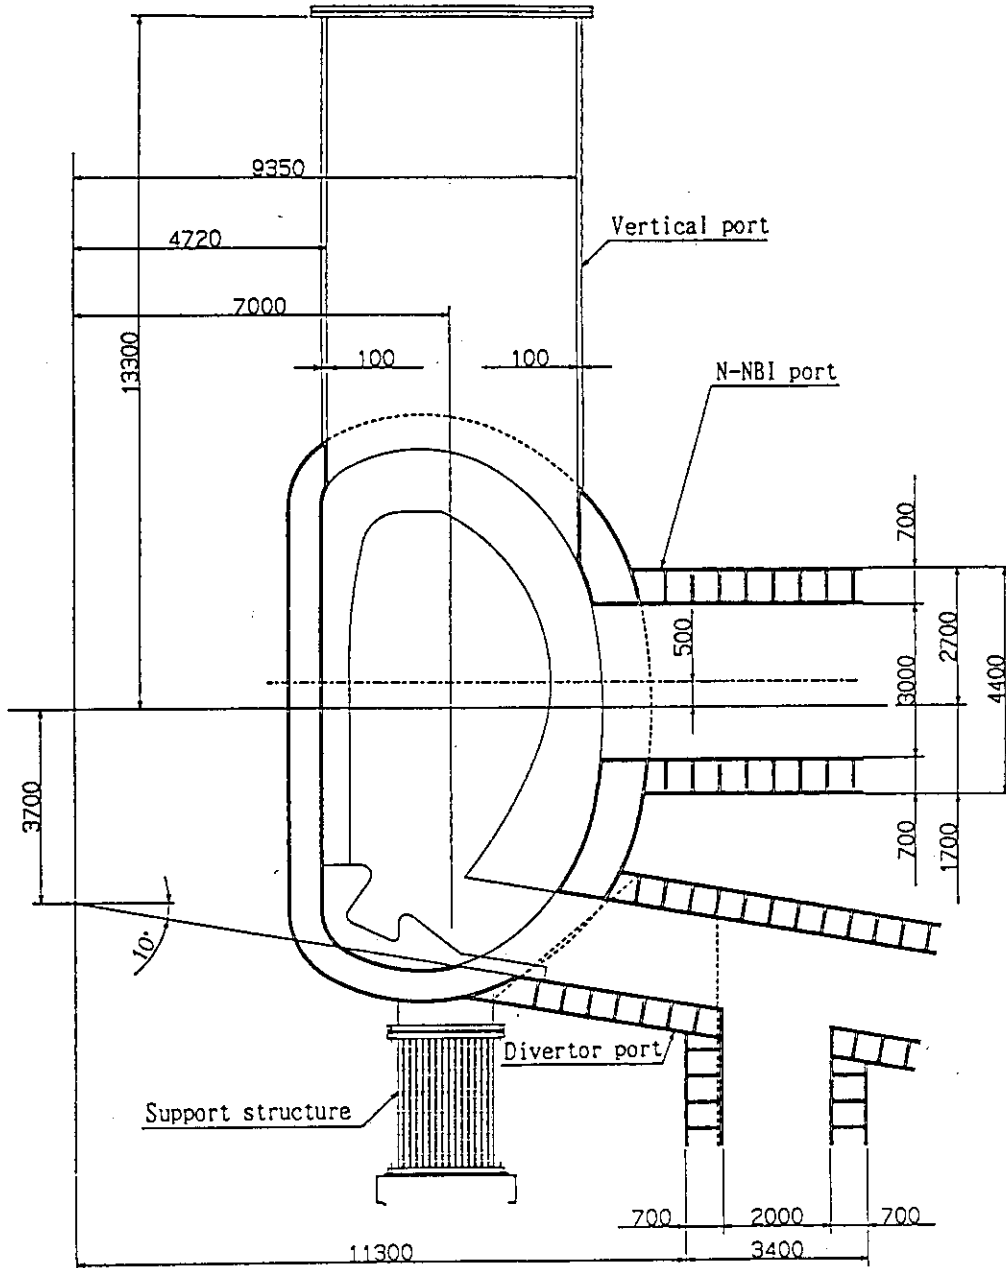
Elevation view of SSTR vacuum vessel and port layout.
